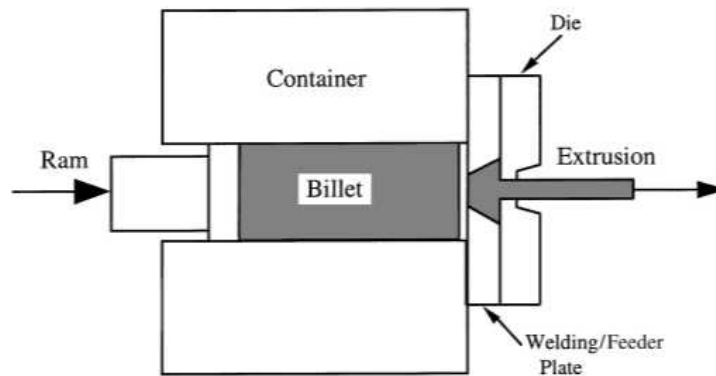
Continuous-type extrusion using welding plate in front of the die
